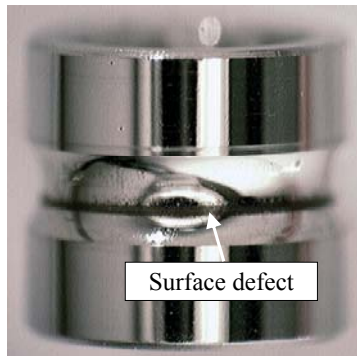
Inner Race of Bearing from Failed Ungreased Fan Sample
